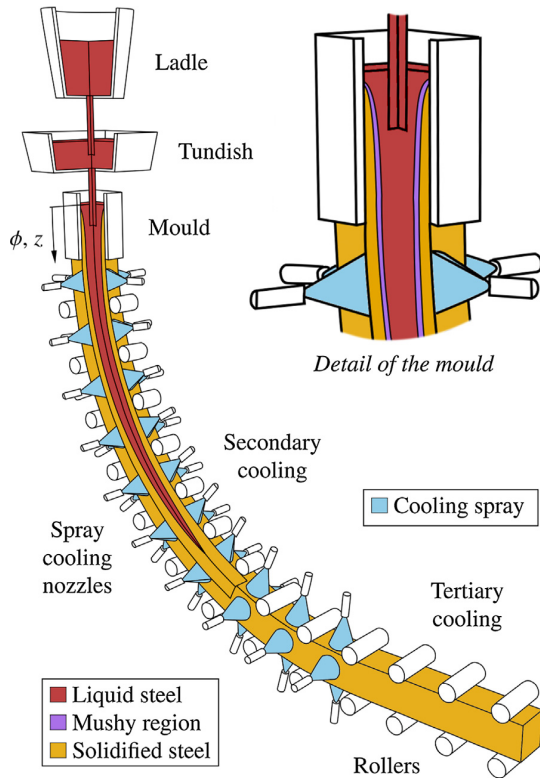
A schematic of the continuous casting machine with the detail of the mould and of the solid–mushy–liquid interface.
